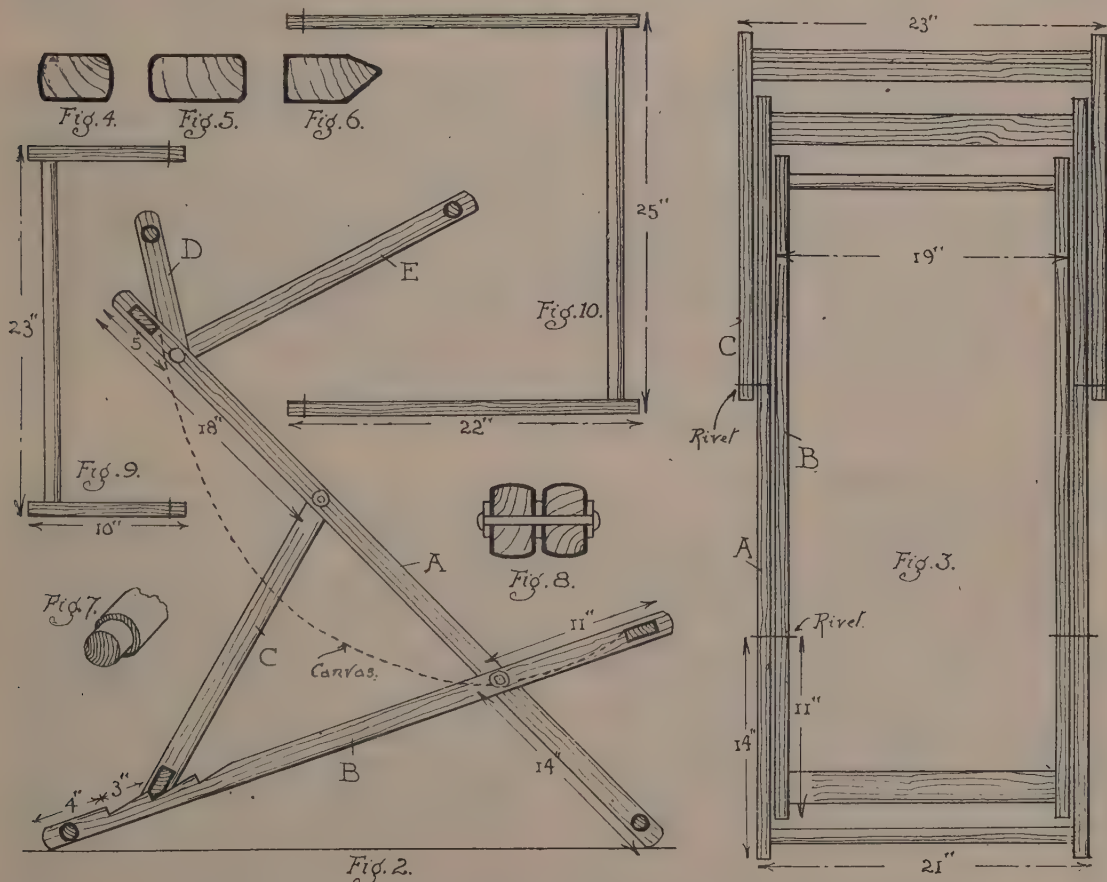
ELEVATION. FIG. 3.—PLAN. FIGS. 4 TO 10.—SECTIONS AND DETAILS.
